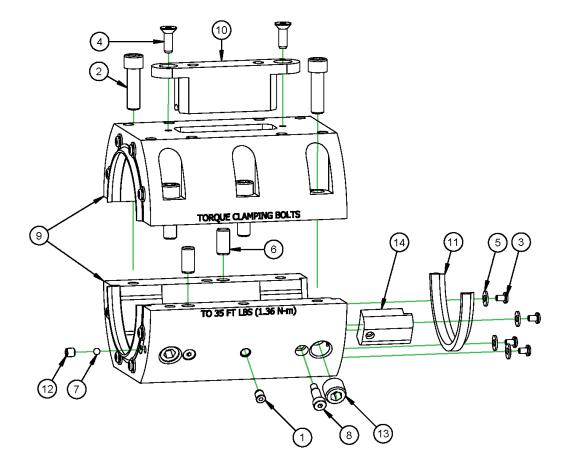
BORING DIAMETER RANGE STACK-UP BLOCKS ASSEMBLY (P/N 81249)
